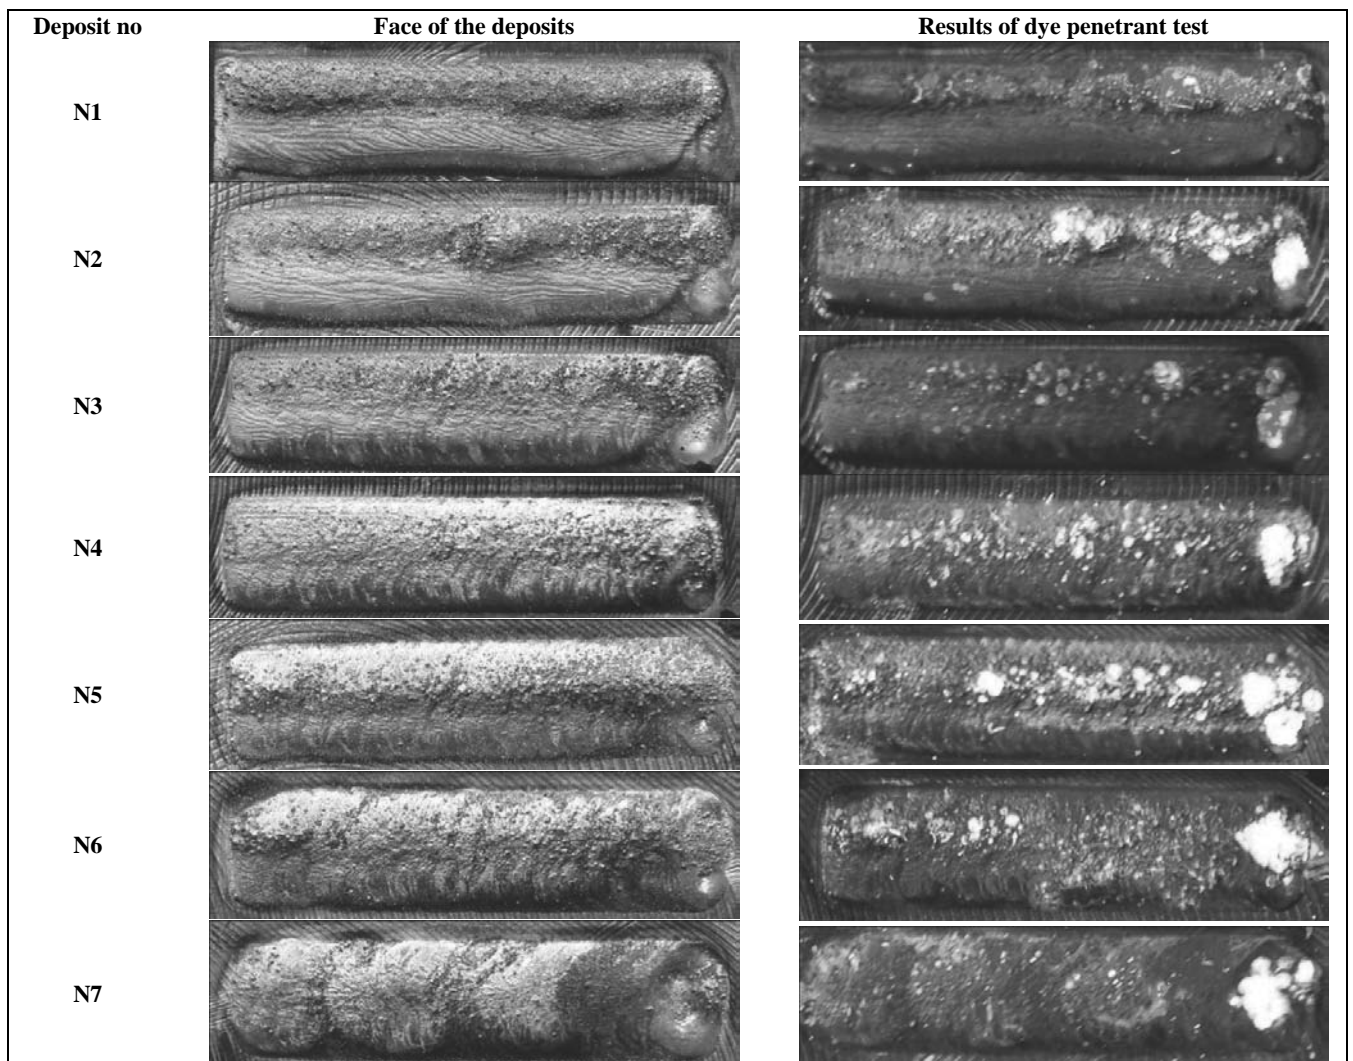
A view of faces of as surfaced „bead-on-plate” deposits and after dye penetrant tests, Table 4
